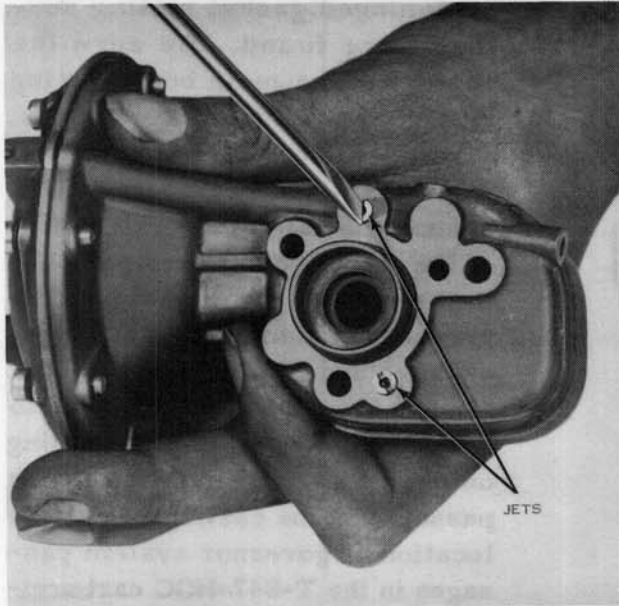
DISASSEMBLY GOVERNOR HOUSING, GASKET, THROTTLE SHAFT SEAL, RETAINER & SPRING
